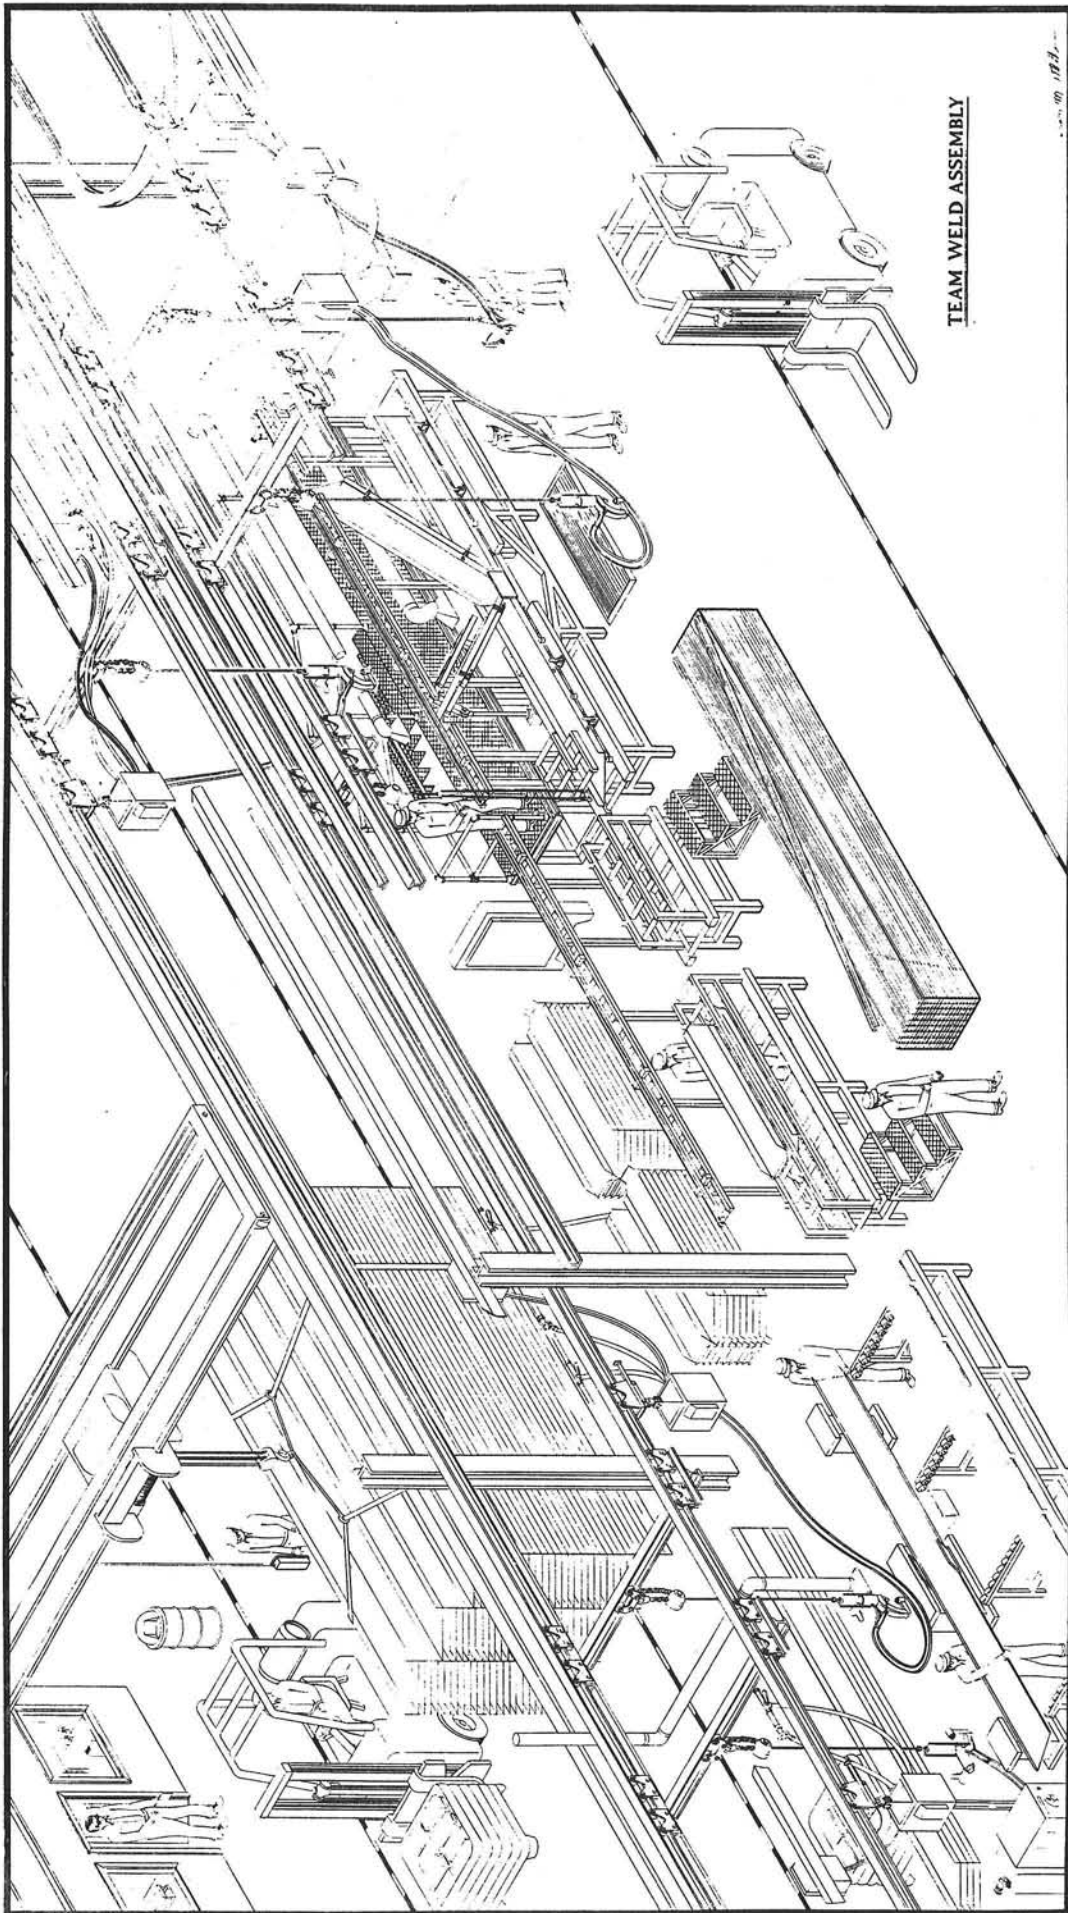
TEAM WELD ASSEMBLY
